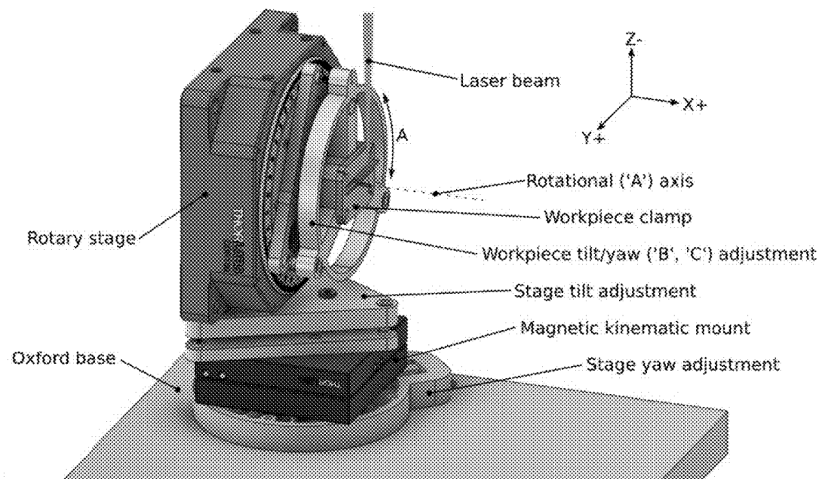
First-generation rotary-assisted stage used for early diamond rotor laser machining. The figure documents the initial rotary-stage concept that preceded the OD-first and centerless-ID machining workflow. Adapted from patent US20210146475A1 [55].
